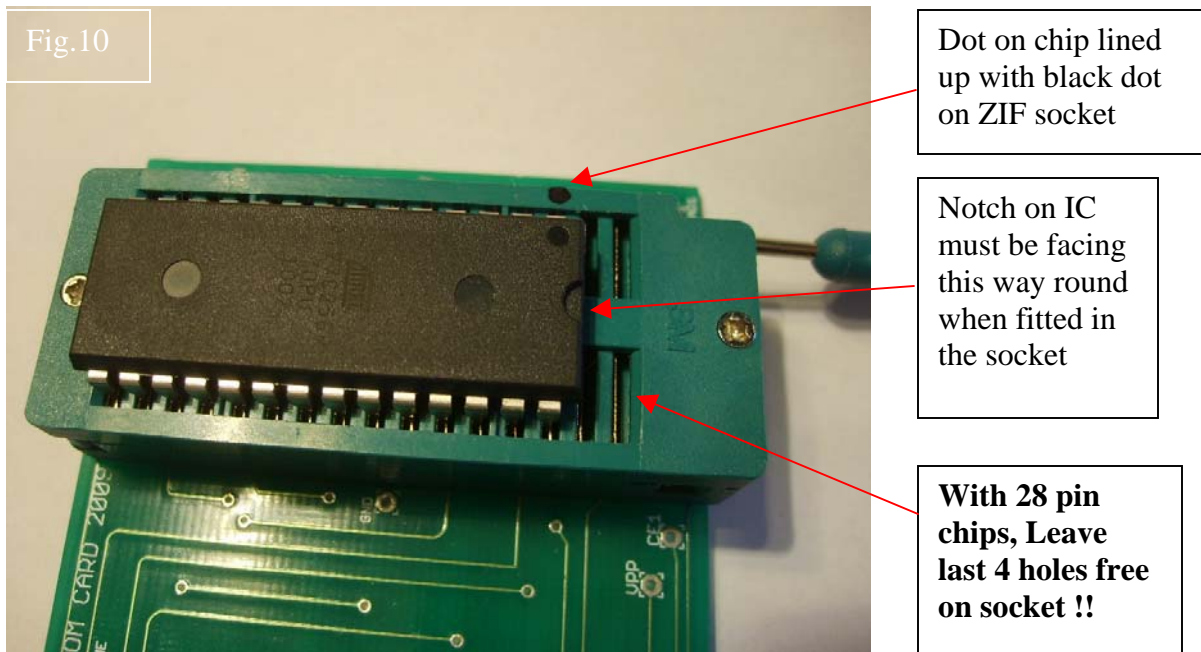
picture above showing correct fitting of the 28 pin ROM chip in ZIF socket
